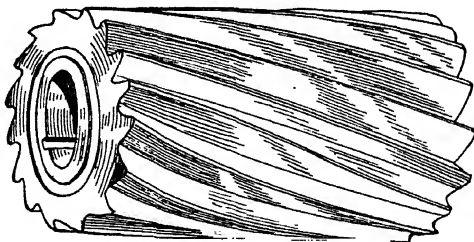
This type of cutter is known as a roller or cylindrical cutter.
